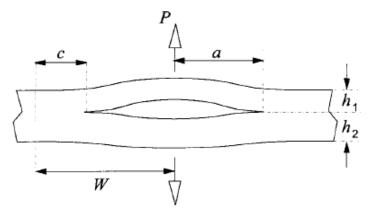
Double build-in beam (DBB) model of fillet weld attachment [4].
